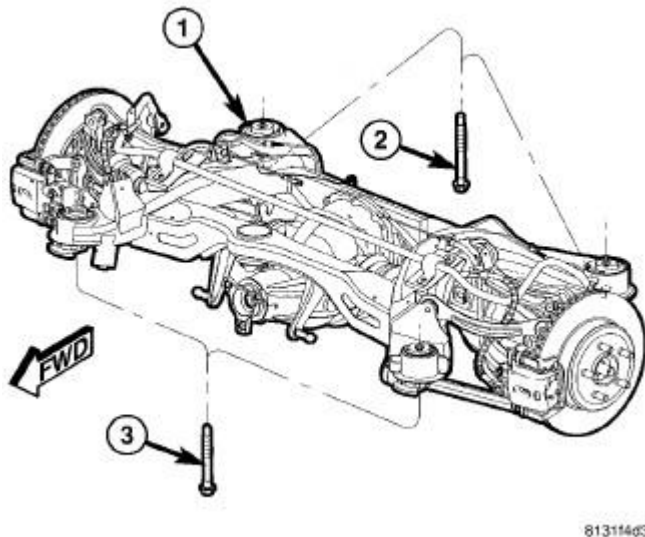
REAR CROSSMEMBER MOUNTING BOLTS
